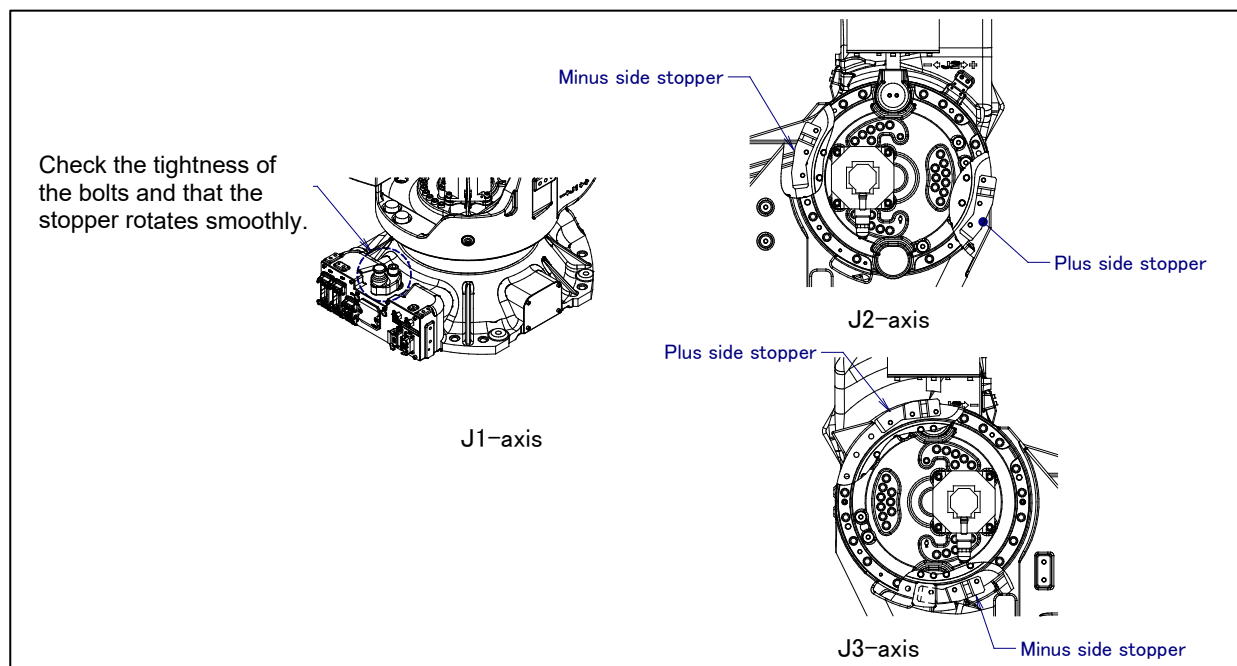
(a) Check of fixed mechanical stopper and adjustable mechanical stopper
